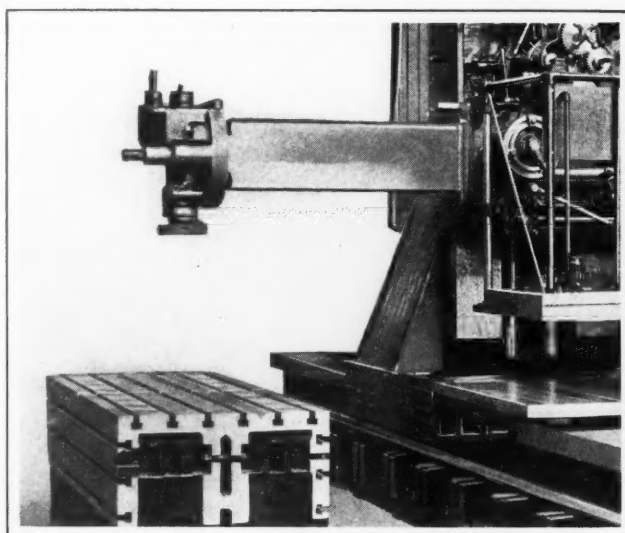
Draw-cut Planer Arranged for Vertical Milling
